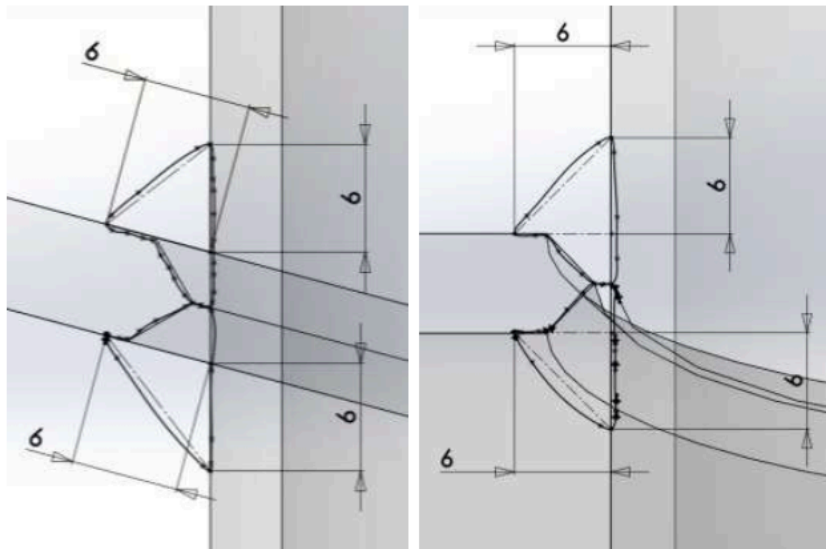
Equal 6mm fillet welds superimposed on complete penetration bevel welds.
